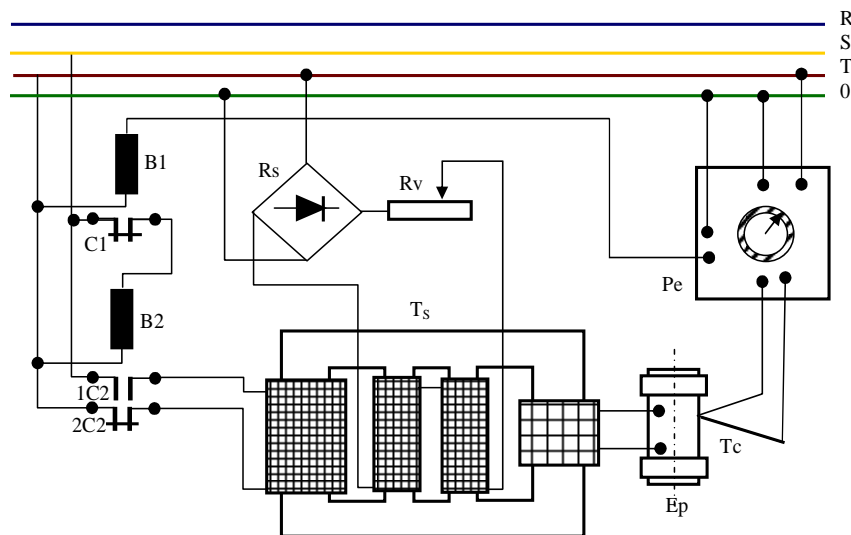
The fundamental circuit of heating by the welding transformer
